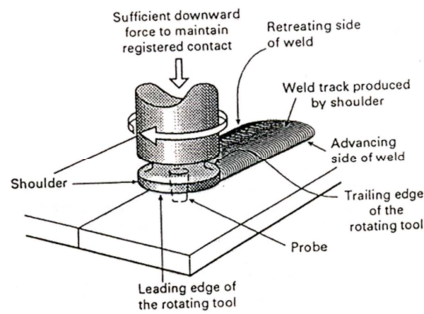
Schematic illustration of Friction Stir Welding
